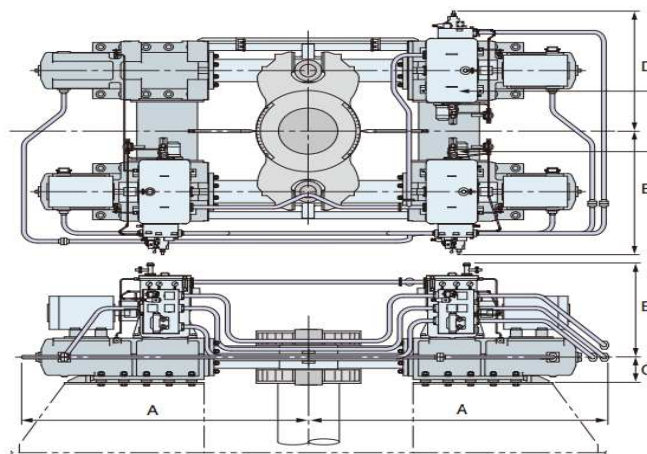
Dimensions of Kawasaki E Series TYPE FE32
